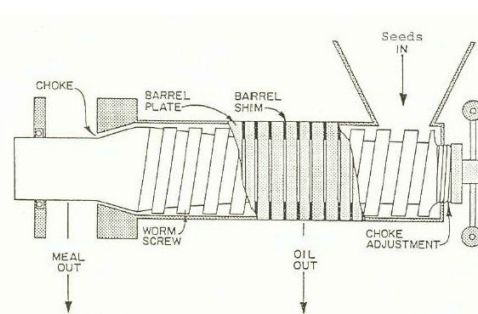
schematic drawing of the strainer type press. Notice the choke adjustment that is on the opposite side of the choke itself. [2]
